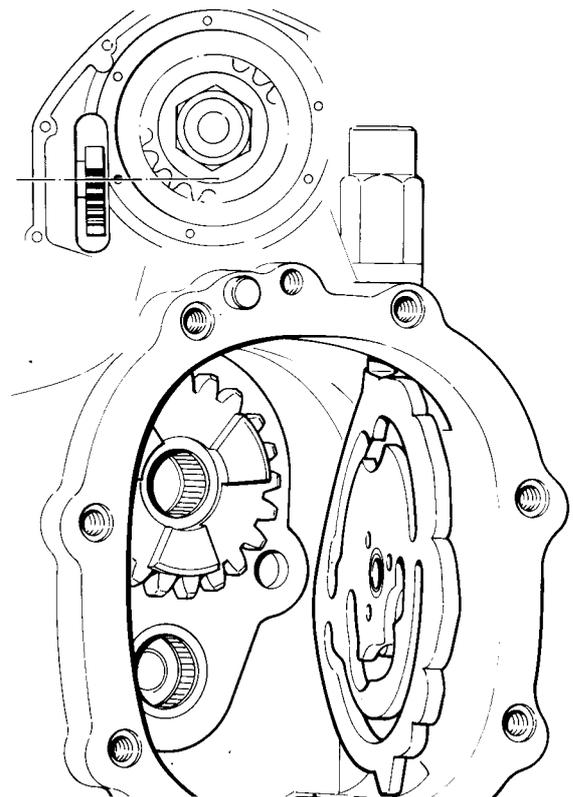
Gearbox re-assembly showing initial camplate location when engaging with the gearchange quadrant.
